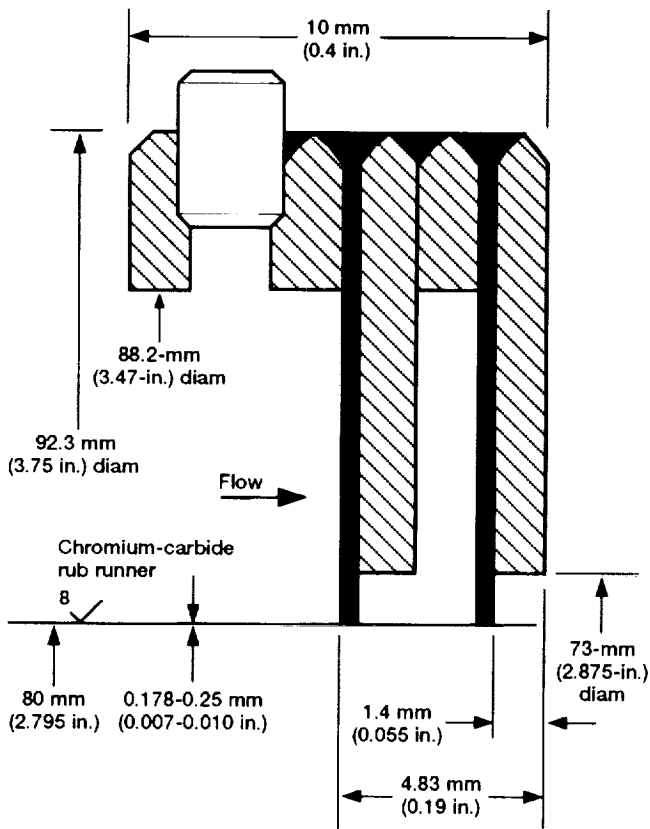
Schematic of labyrinth compressor discharge seal system. (Seal teeth and axis established by diameters A and B to be concentric within 0.003 full indicator reading. No steps allowed on tooth face or at fillet radius. All dimensions are in inches.)
